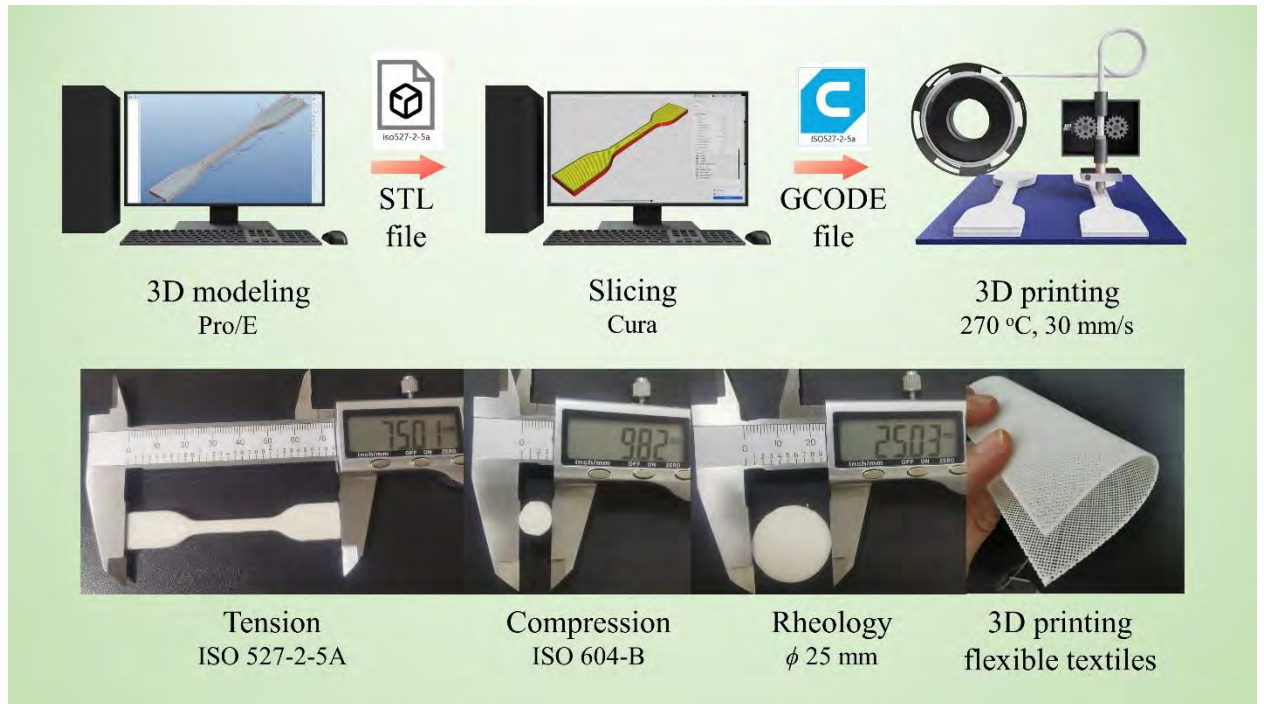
3D printing and 3D-printed samples using rPET/ADR 4468 filament.
